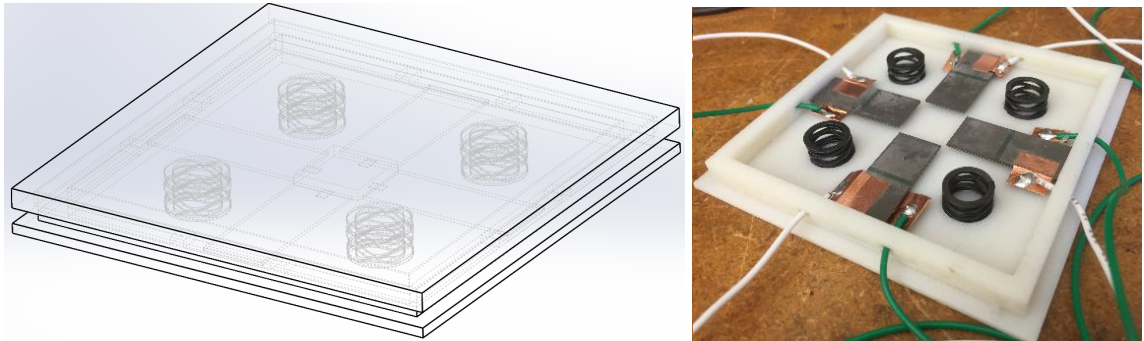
Assembled plucking tile bottom with bimorphs and springs attached
